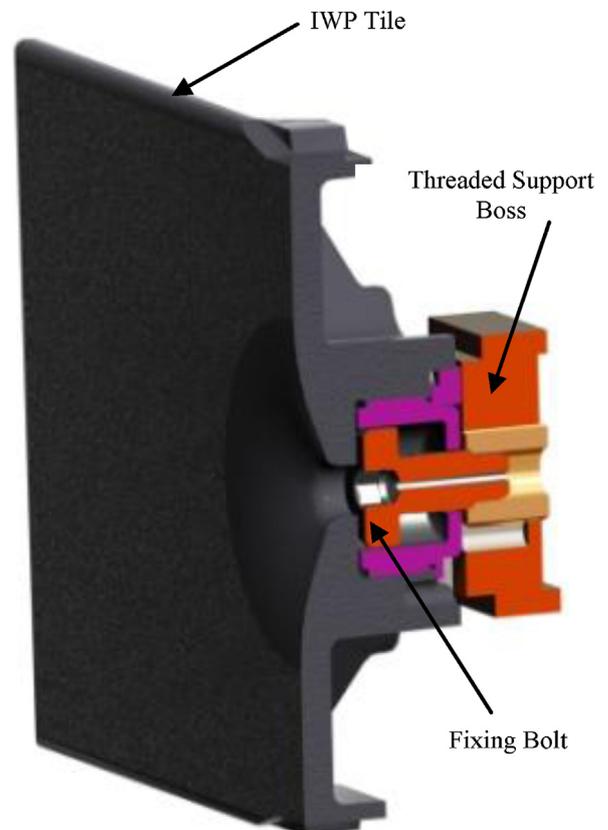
A section view through an inner wall protection tile and highlights the fixing bolt retracted the tile does not fully engage with the vessel interface.
